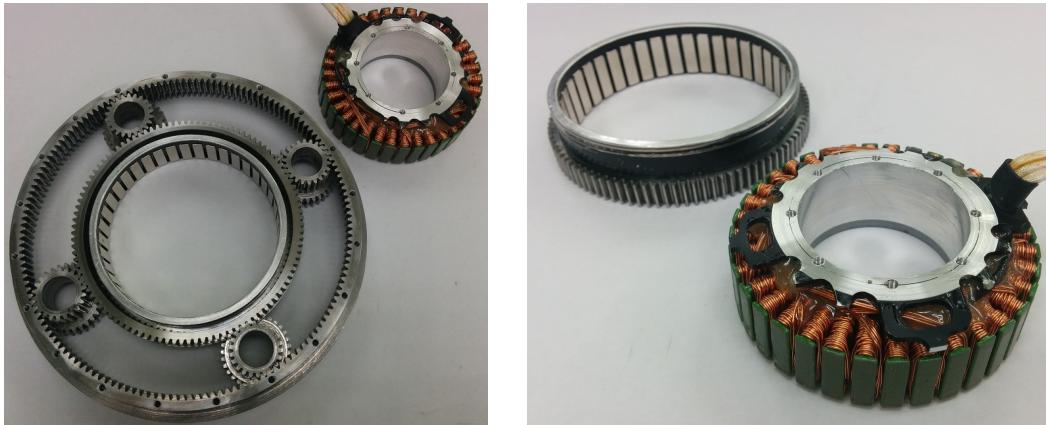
Low reduction (1 : 10) bearingless planetary gearbox on left and modified driving outer rotor motor on right. The motor rotor is incorporated into the gearbox driving sun gear.
